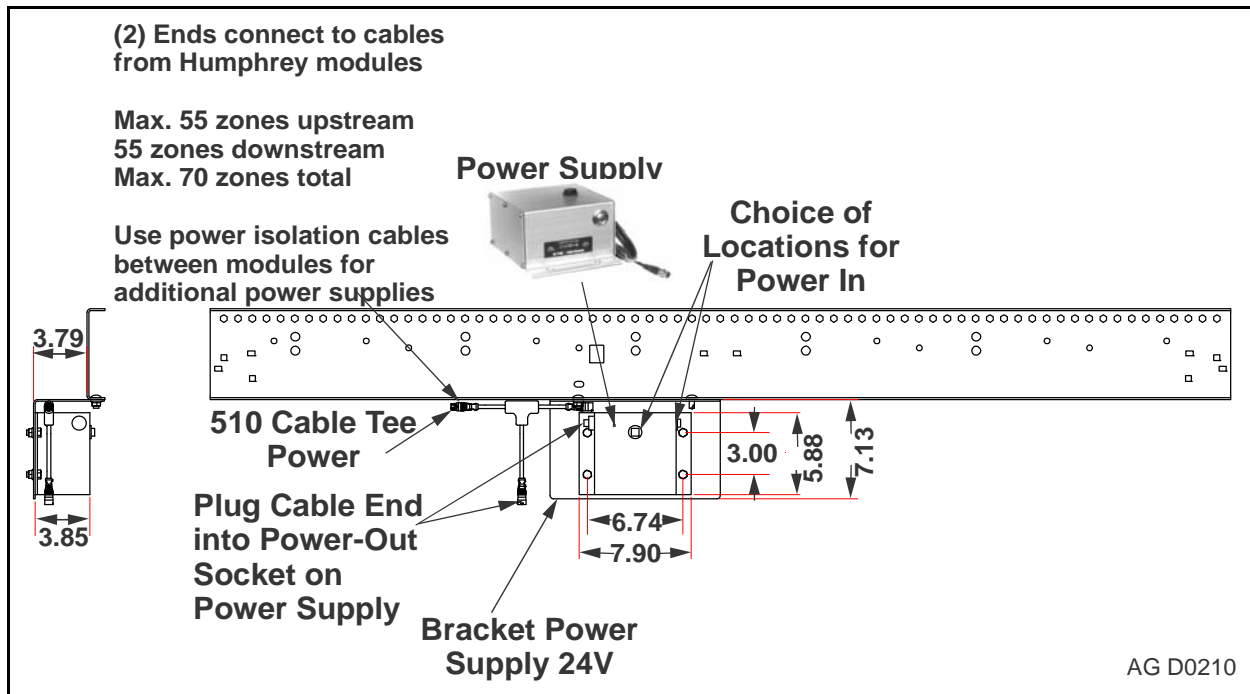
11 Power Supply / Slug-Module Kit - (T-Cord not shown)
